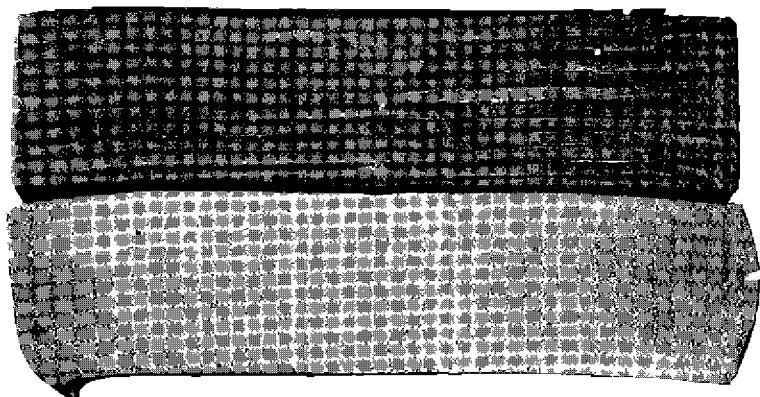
Appearance of rich bars of car No 667 after pickling. Upper figure of the cut, cross section of wrought iron bar. Lower figure of the cut, cross section of steel bar
